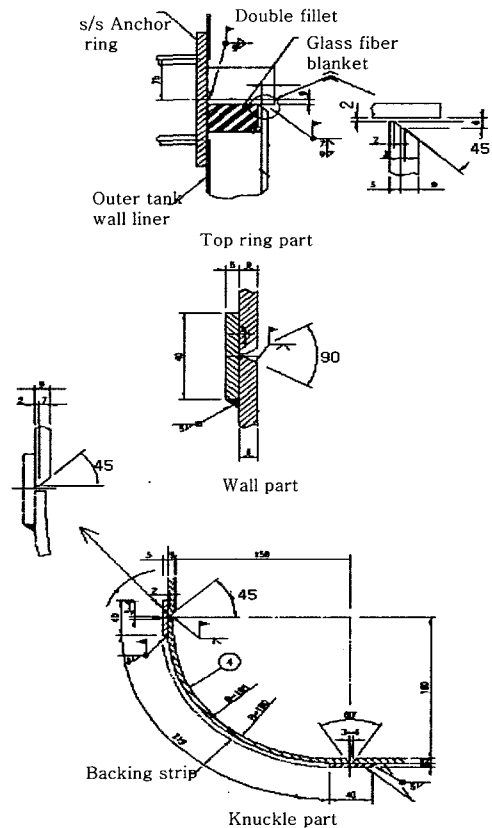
Shape of weld joint for corner protection liner plate⁷⁾
